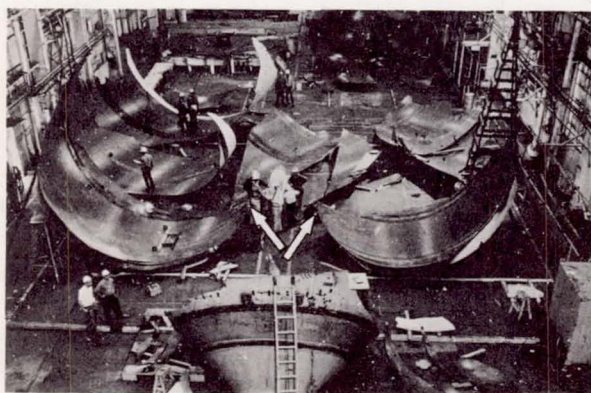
Pressure vessel failure due to weld flaw.
